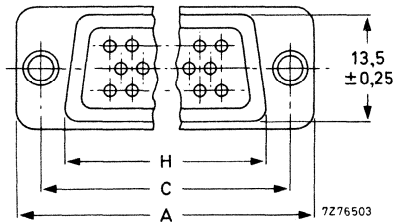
Terminal side of pin (or socket) connector; see also Table 3.
